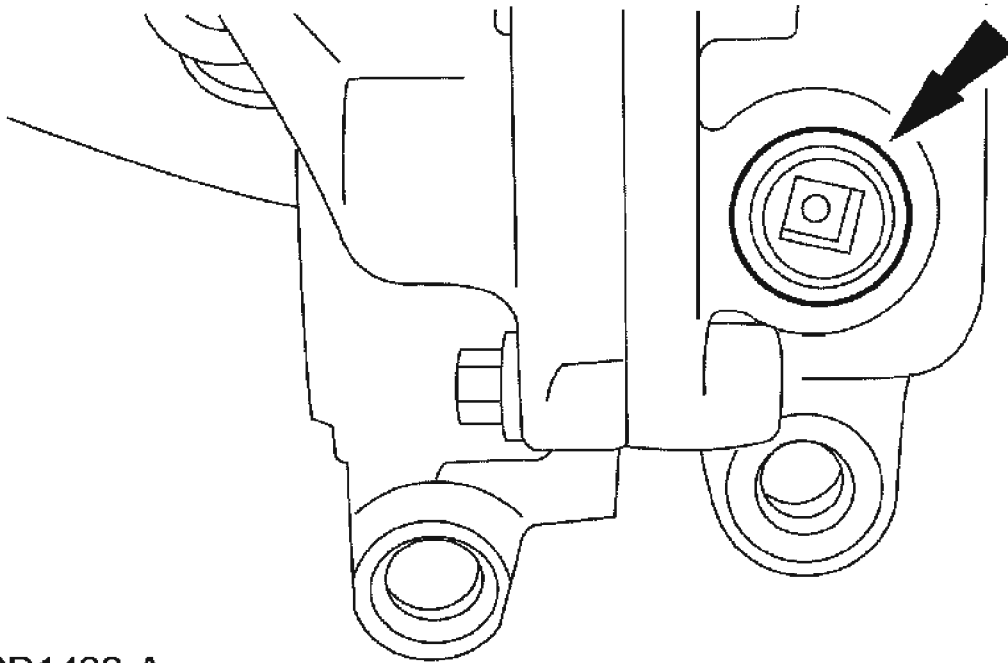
Removing Transmission Range (TR) Sensor
